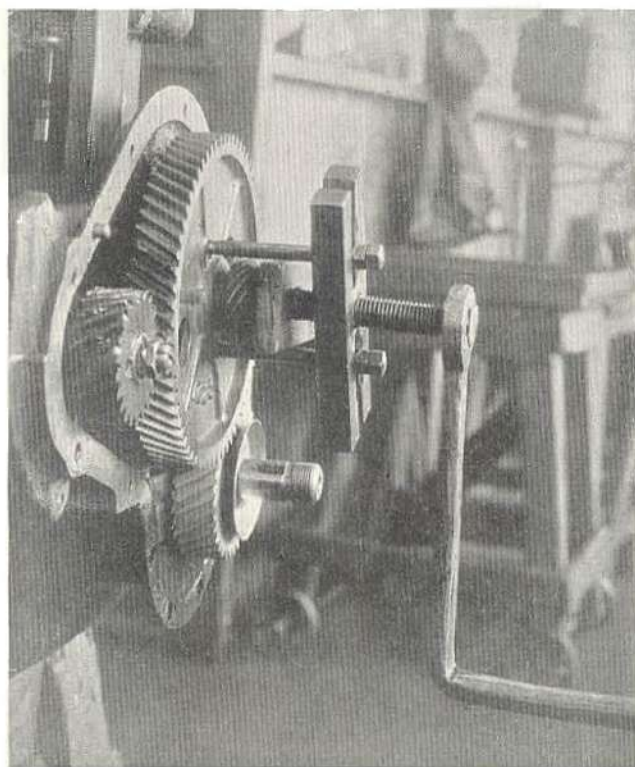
Factory tool for removing timing gears. It is adjustable and can be constructed by the average mechanic.
